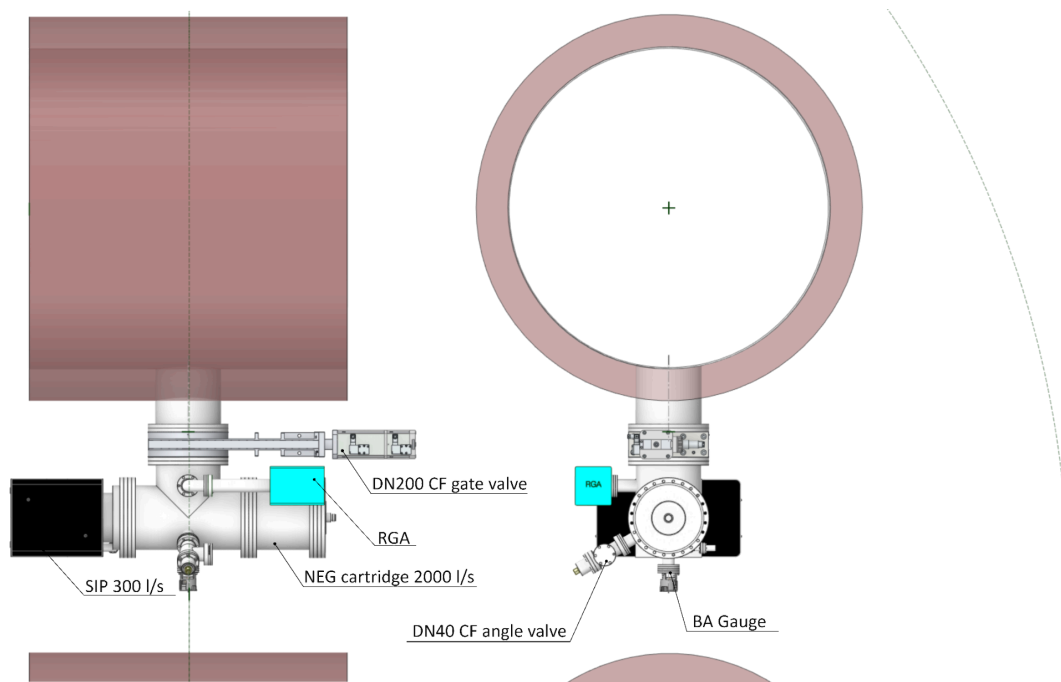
3D schematic of an UHV pumping group assembly. The arrangement shown is one of many possible.
